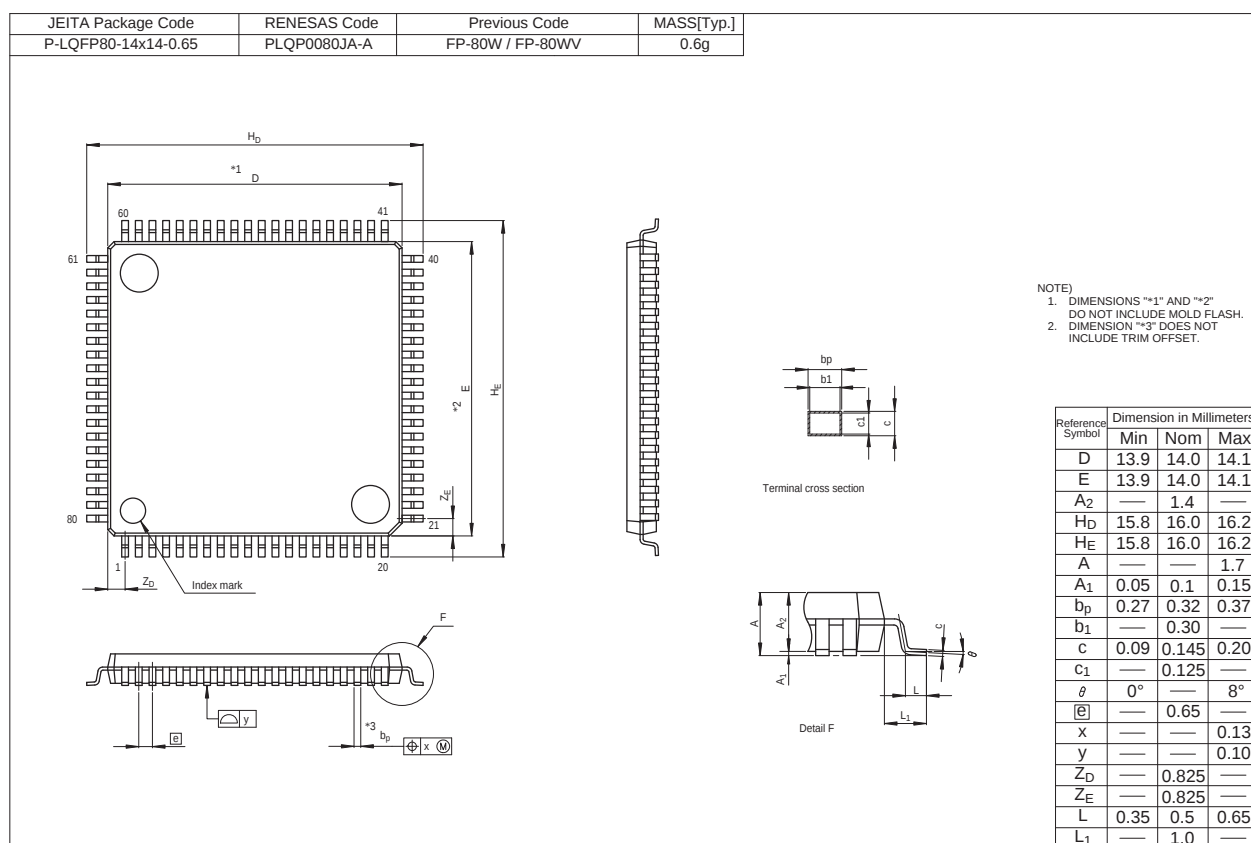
Pin LQFP (PLQP0080JA-A) Package Dimensions
